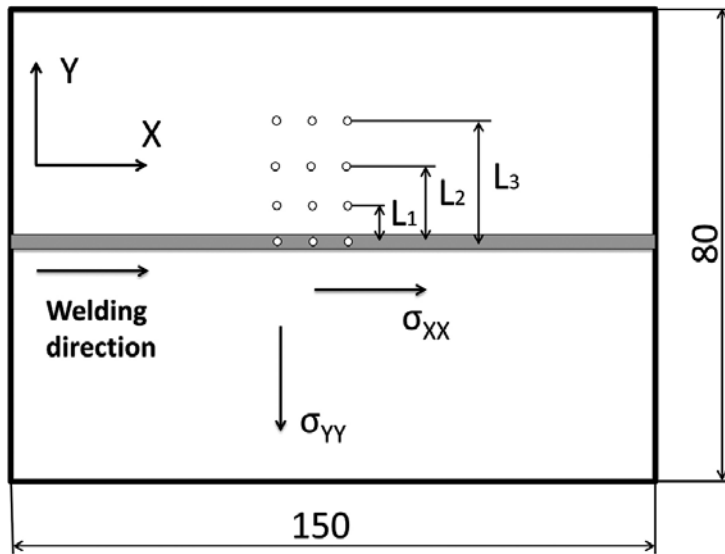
Geometry of welded plates and locations of drilled holes for residual stress measurements.
